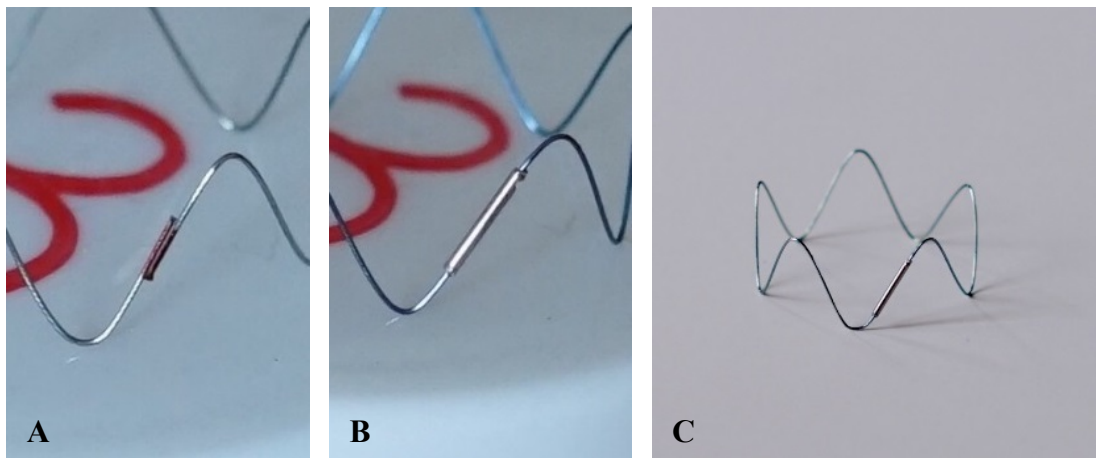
Stent prototypes whose free ends connected by (A) laser welding and (B) 6mm long stainless-steel tube. (C) A z shape stent prototype, wire diameter 0.24mm.
